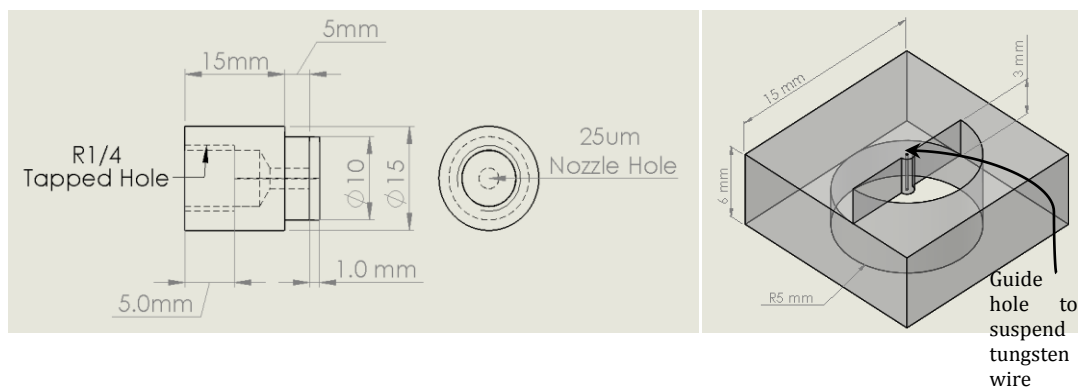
Air Jet mechanical drawing. Cap used to align tungsten wire within centre of aluminium sleeve also show. All dimensions in mm except thread described.
